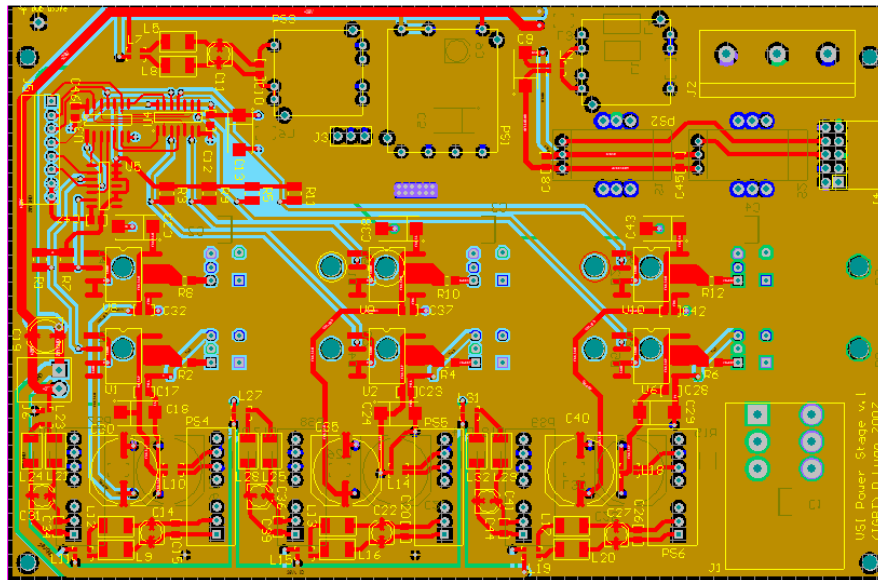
Traces and planes of the PCB top layer (red) and mid-layer 1 (gold)
